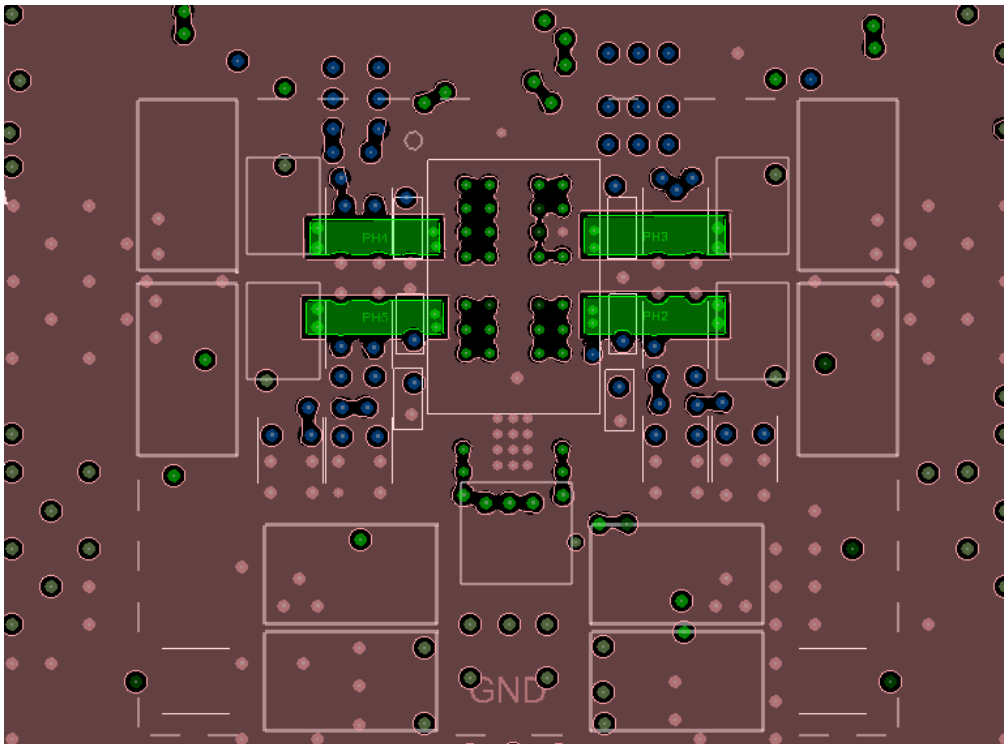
PCB Inner Layer Showing PH2-5 Traces
